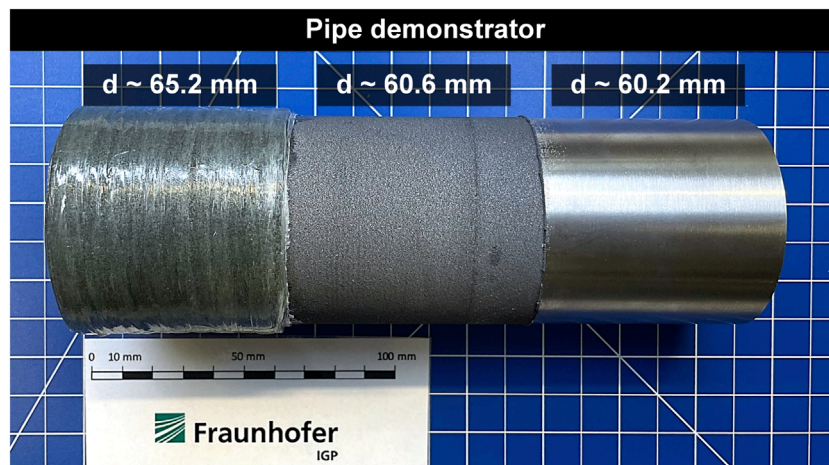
Finished pipe demonstrator and coating thicknesses measured using a caliper gauge.
